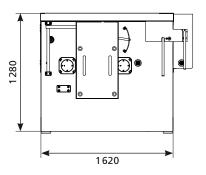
Dimensions (mm) of a KME3-812 with motor at the rear, right-hand design
